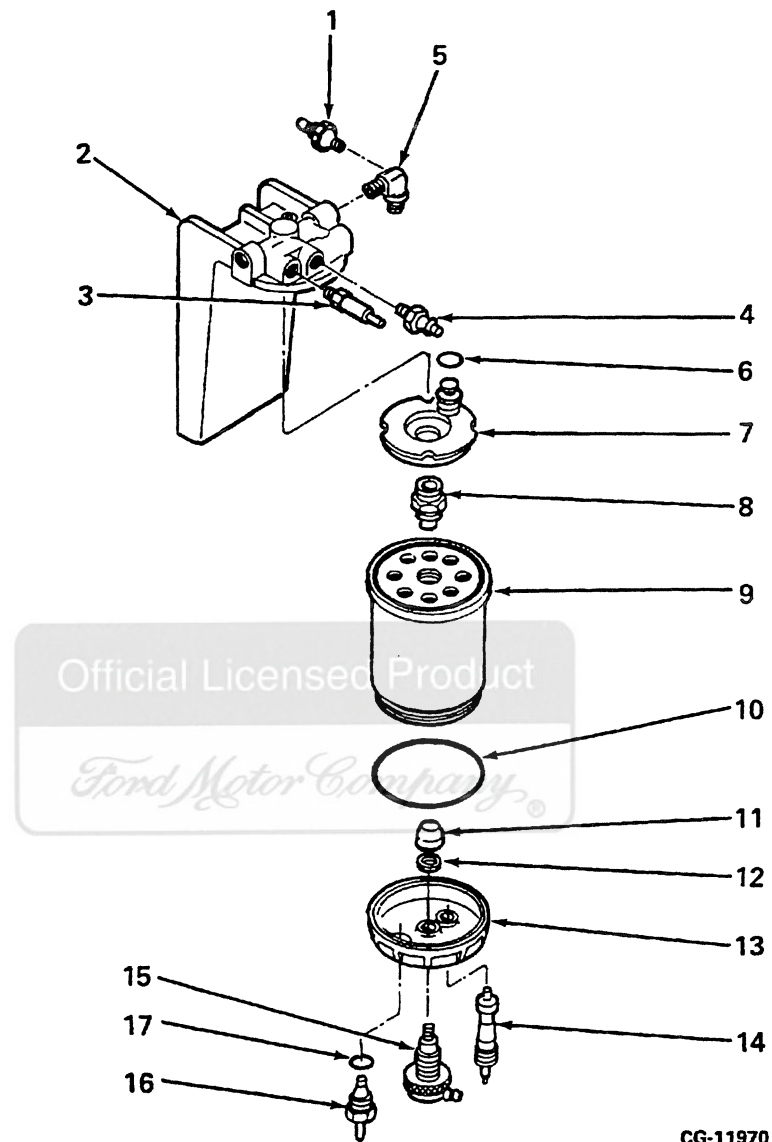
B. Fuel Filter/Water Separator/Heater and Fuel Supply Pump Assembly
